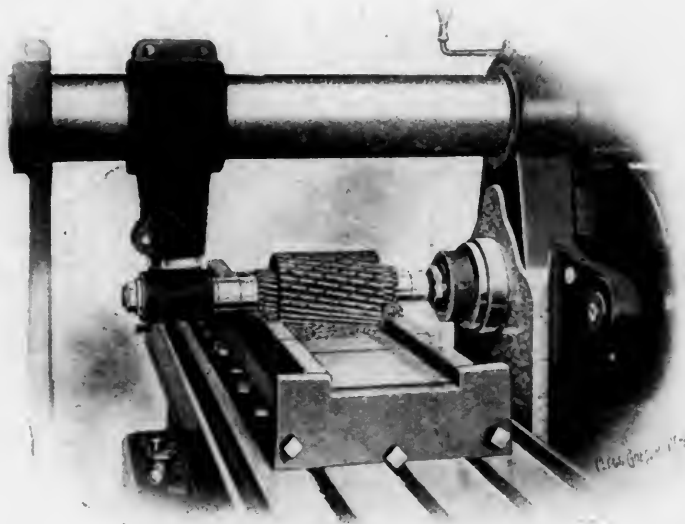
AN EXAMPLE OF RAPID MILLING.
